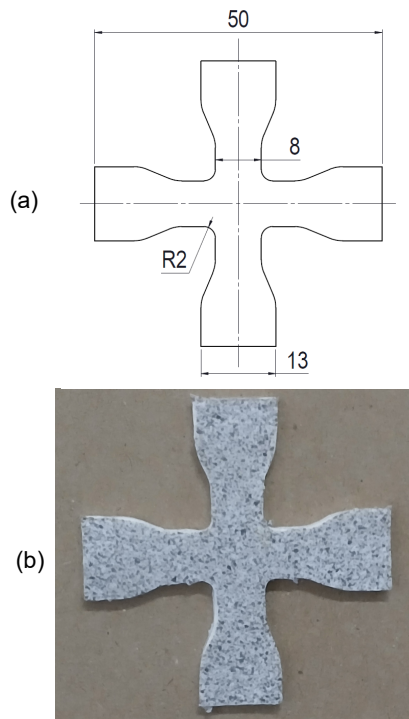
Biaxial tension cruciform specimens (a) Specimen schematic, dimensions in mm (b) Cast and speckled specimen
